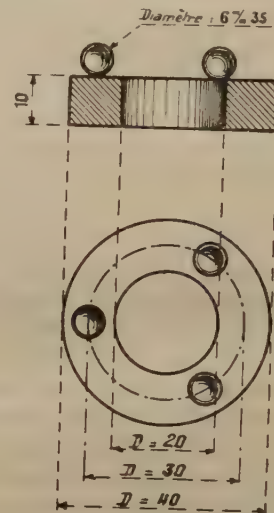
French Northern Railway. — Test pieces for wear test by rolling, of the various types of steel used for rails.
